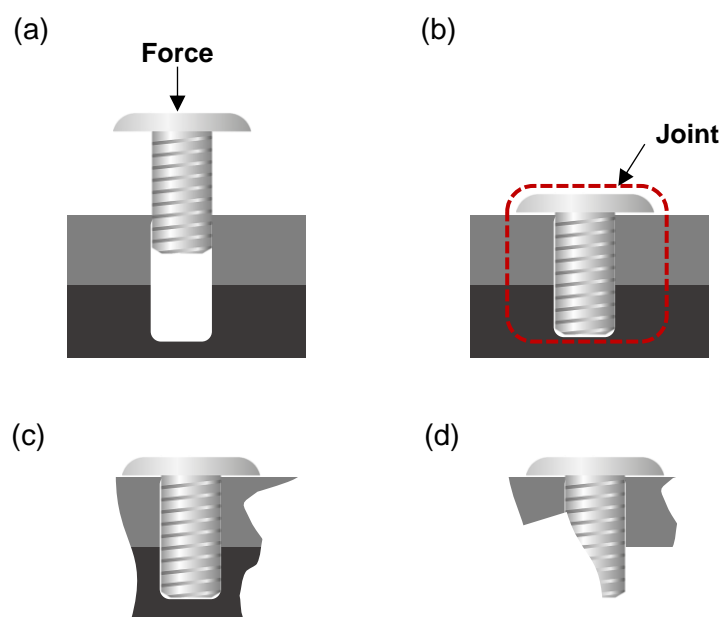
Differentiation of the terms *joining* and *joint* using the mechanical fastener as an example. (a) The joining of two parts using a machine screw; (b) Mechanically fastened lap joint using a machine screw; (c) Shredded particle consists of unliberated joint; (d) Shredded particle consists of partially liberated joint.
